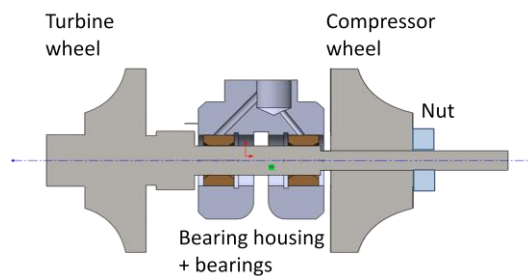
Schematic cross section of a turbocharger rotor bearing system.
